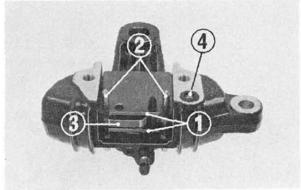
1 Pad 3 Pad set spring 2 Pad pin 4 Joint seal
